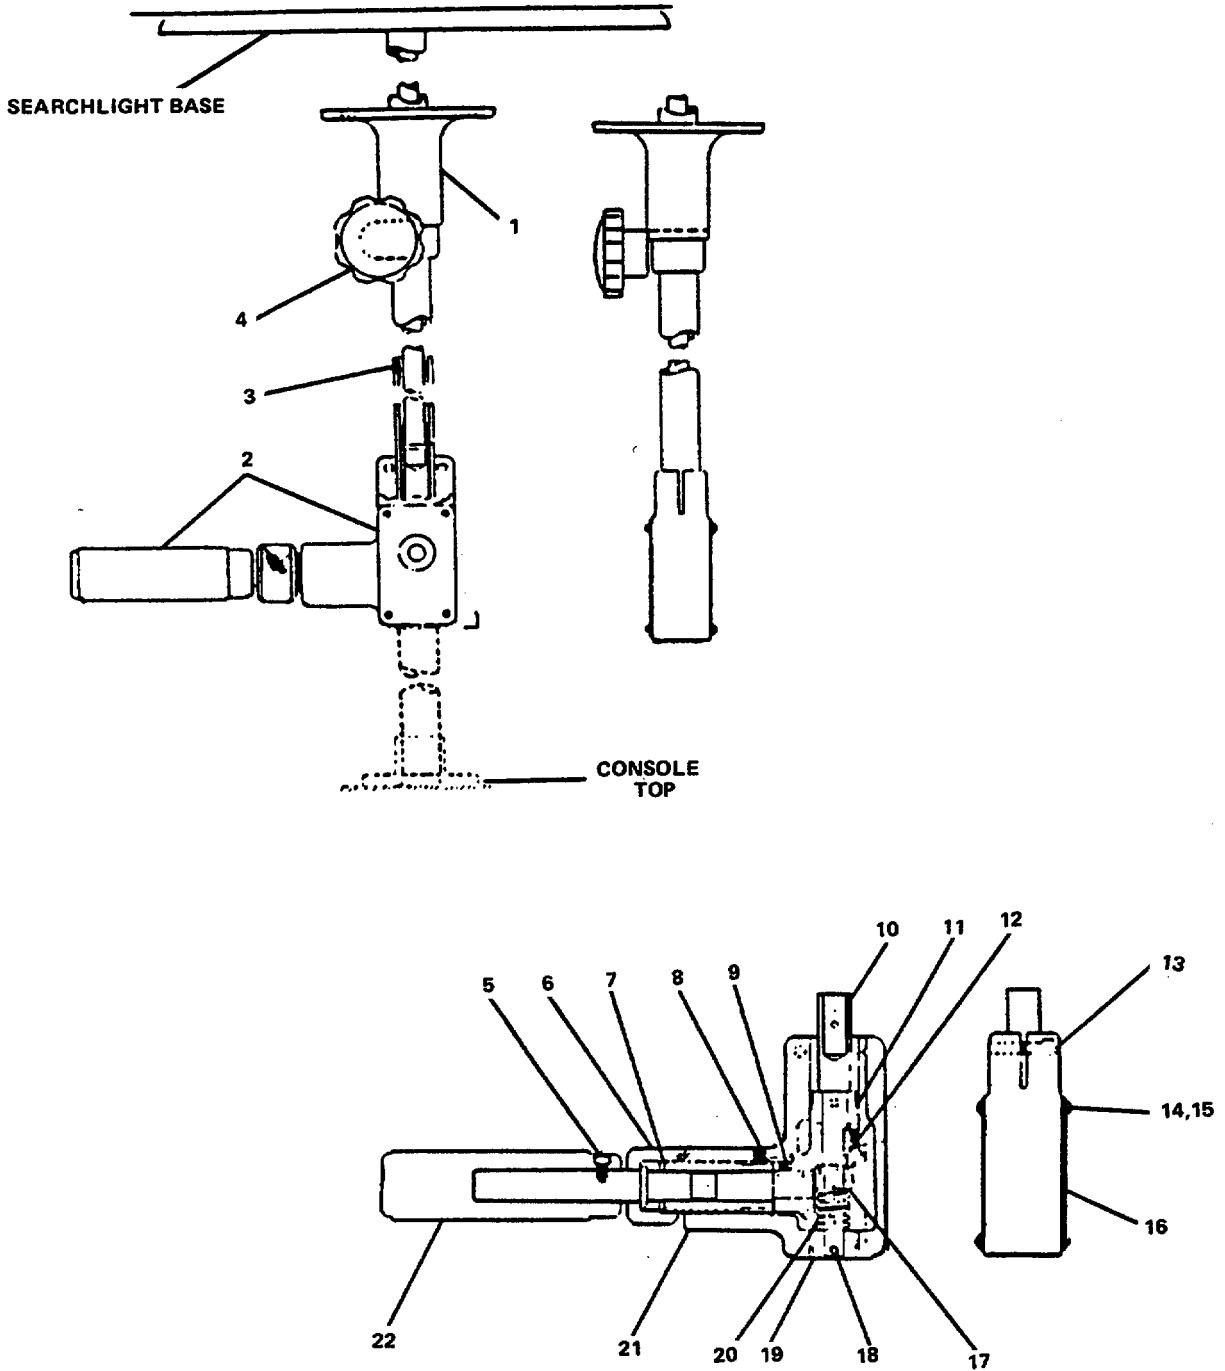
Searchlight Leveling Gear Assembly.
